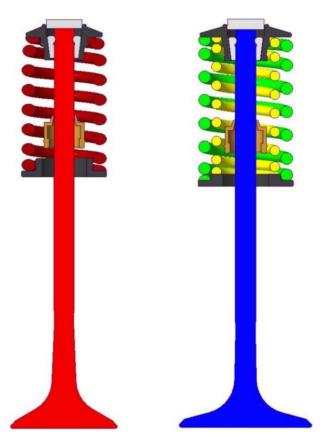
SECTION VIEW OF INTAKE AND EXHAUST VALVE
